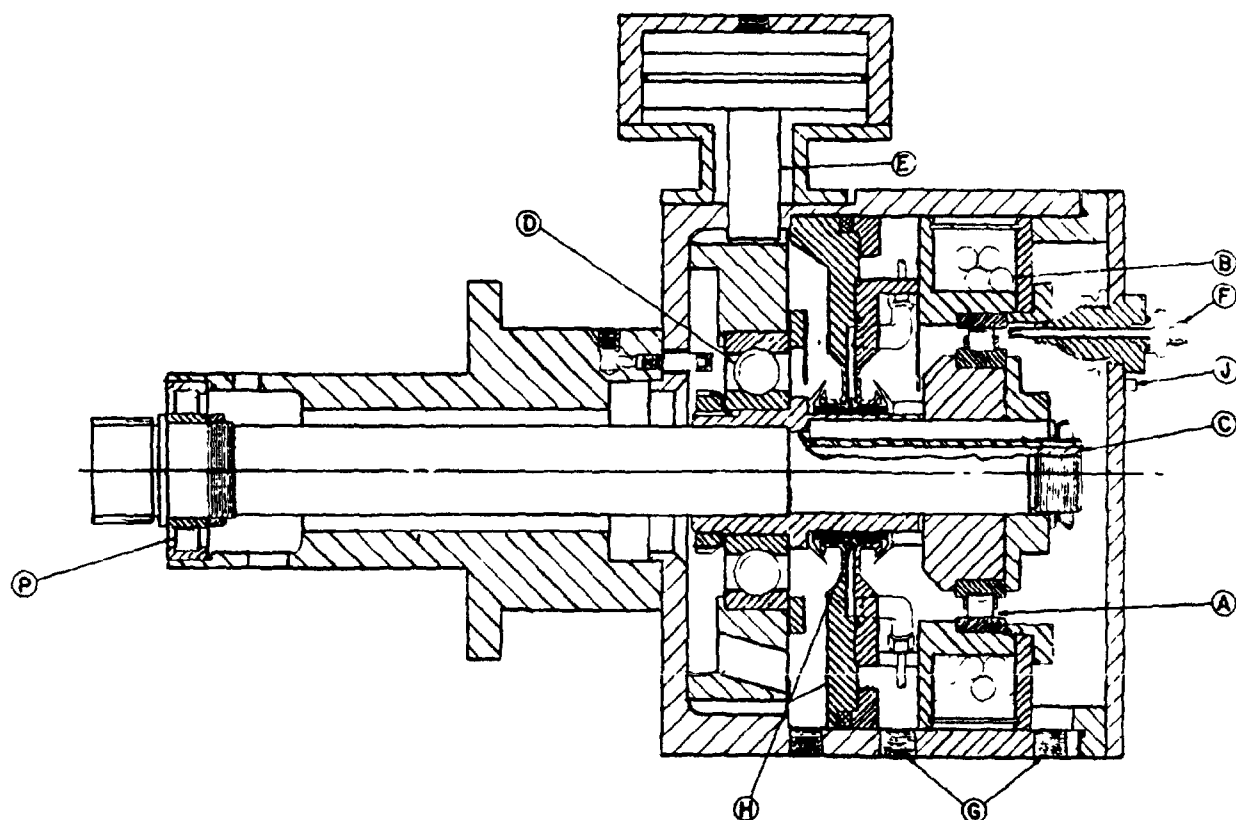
Cross Section of 100-mm Roller Bearing Machine
